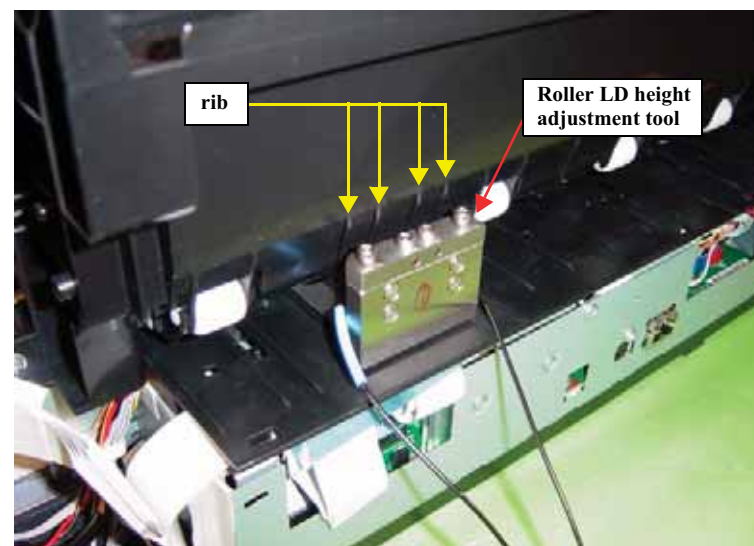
Setting the Roller LD Height Adjustment Tool
